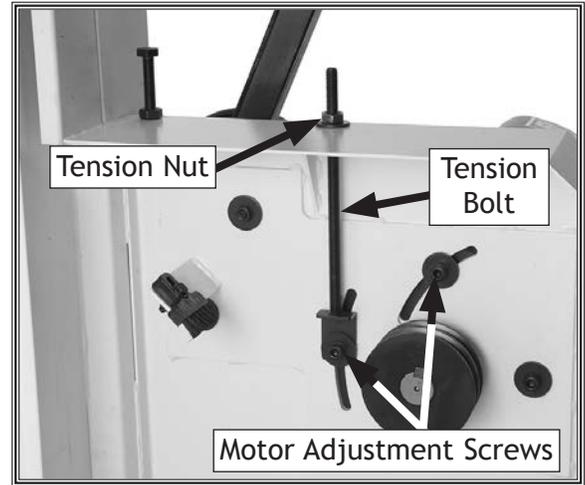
Motor mount bolts and tension bolt. (Lower wheel removed for clarity.)
